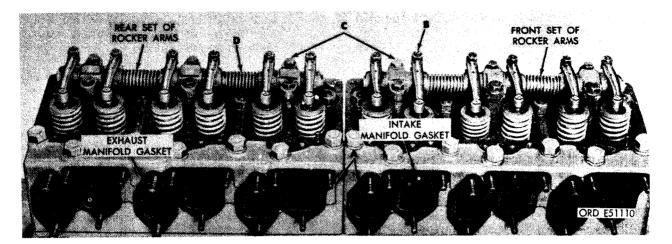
REMOVING OR INSTALLING INTAKE MANIFOLD GASKET AND ROCKER ARMS.
